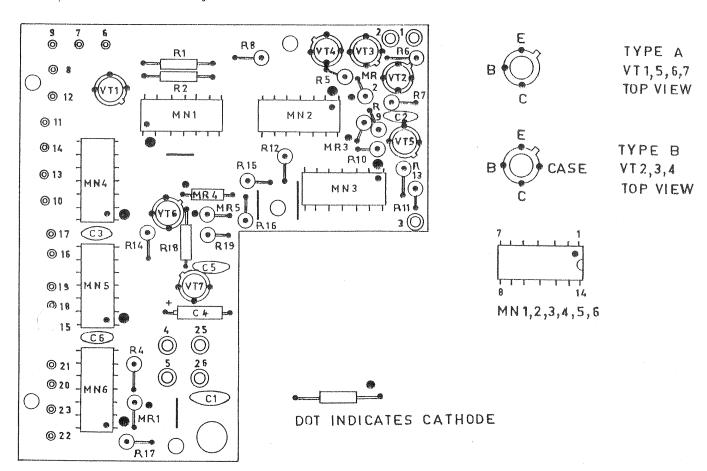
FREQUENCY DIVIDER BOARD 10-1CB1 - COMPONENT LAYOUT
